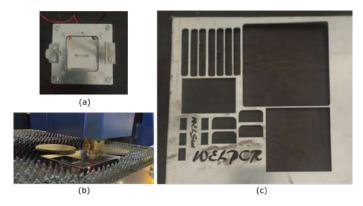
(a) 2D parts in WELPCR (b) 2mm aluminium sheet under laser cutting machine (c) Aluminium sheet after laser cutting
